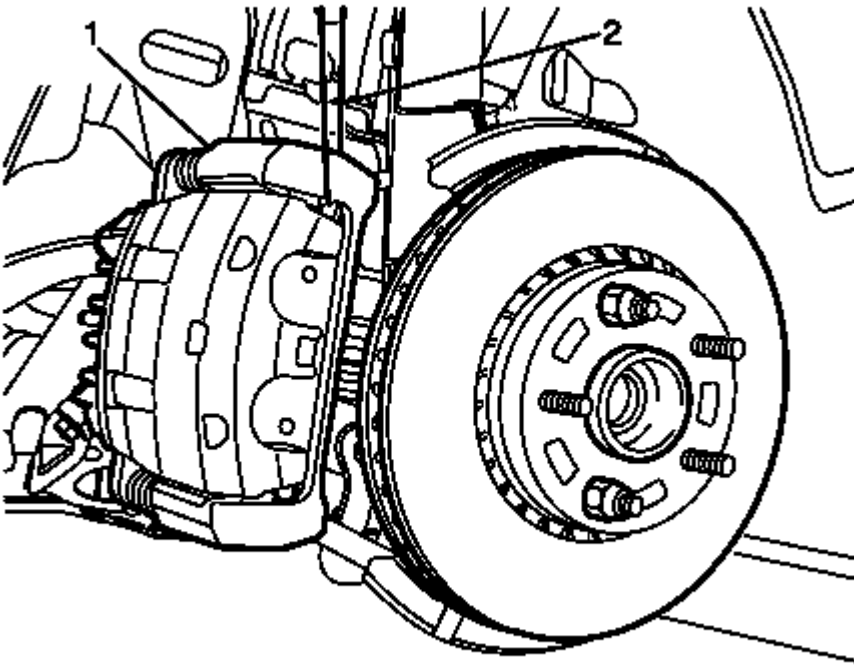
Locating Brake Caliper & Heavy Mechanic's Wire
